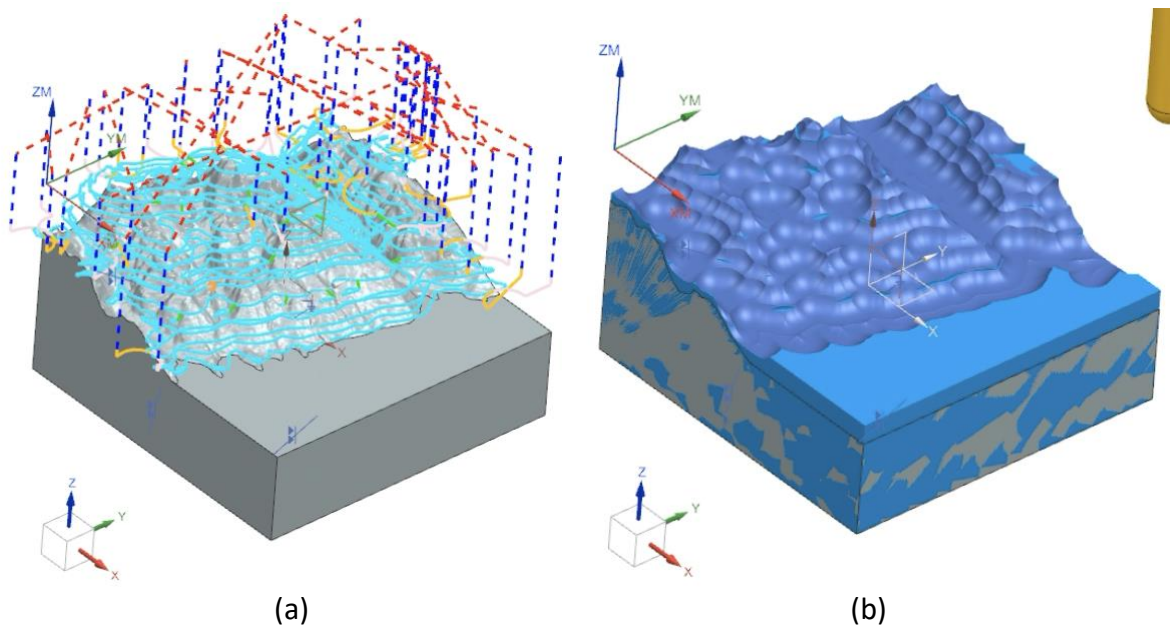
Roughing 2 – Cavity Milling  $\frac{1}{2}$ " ballmill (a) tool path and (b) IPW.
